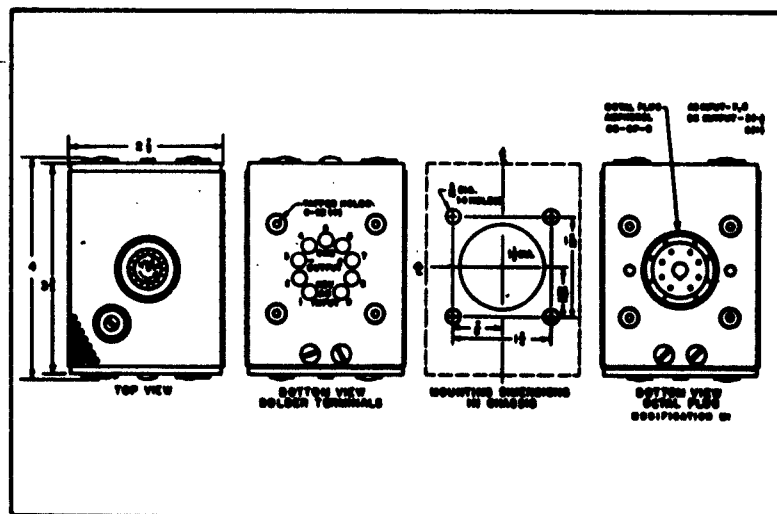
Top and Bottom View and Mounting Dimensions of Power Supply
